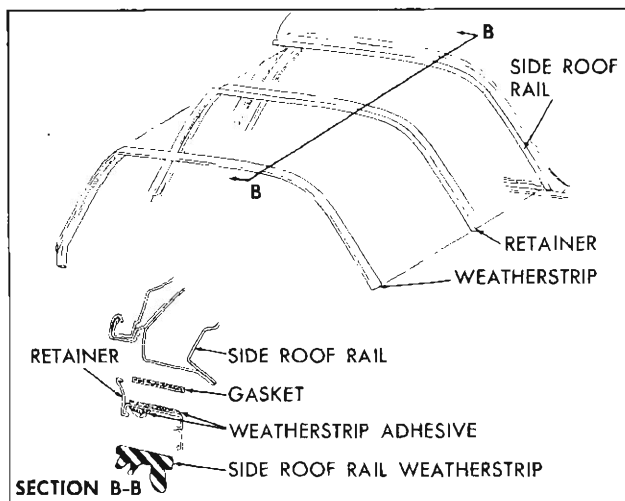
Side Roof Rail Weatherstrip Assembly—47 Styles
